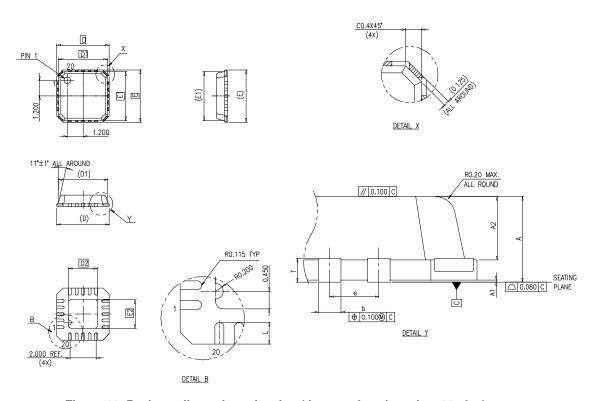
Package dimensions drawing (the actual package has 16 pins)
